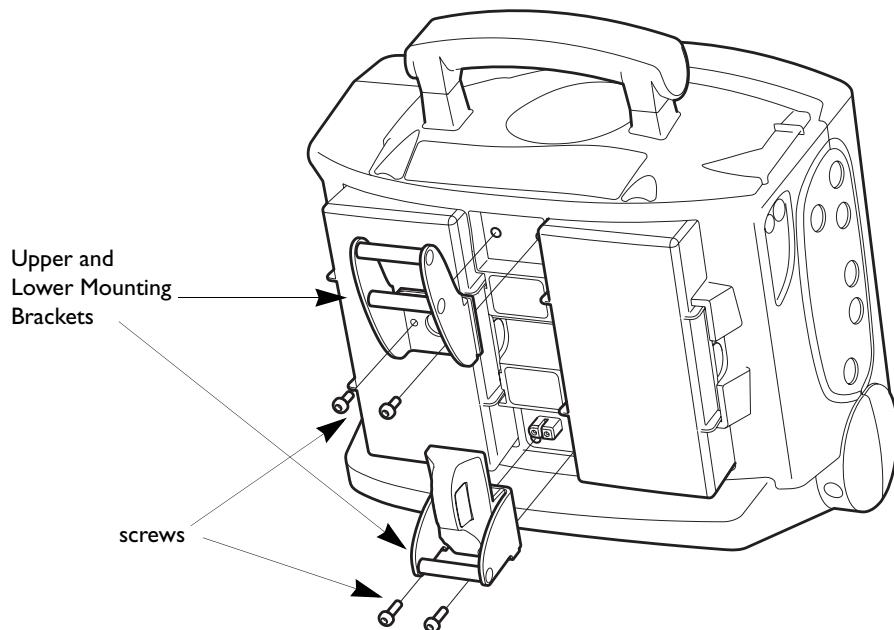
Positioning of the Mounting Frame and Wall Mount Elements
